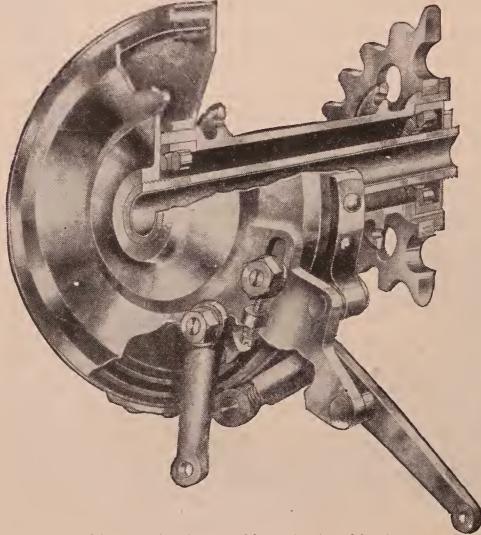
Typical Double-Acting Band Brake Courtesy of Excelsior Motor Manufacturing and Supply Company, Chicago
